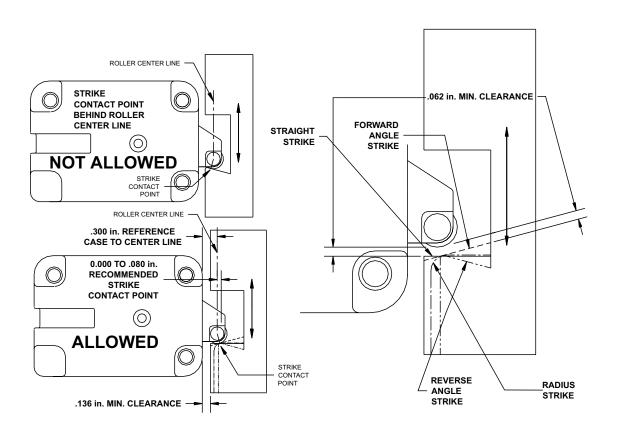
Roller Slide Bolt Clearances, Strike Types & Contact Points
